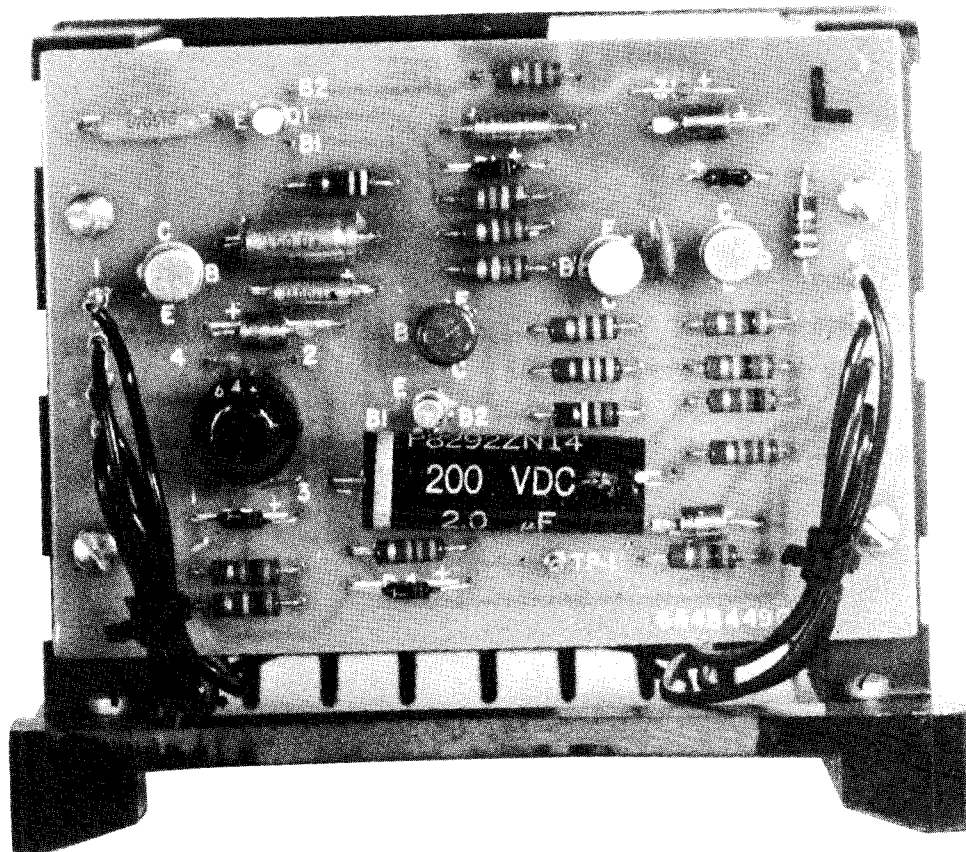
Type SGR-51 Reclosing Relay (Rear View).
